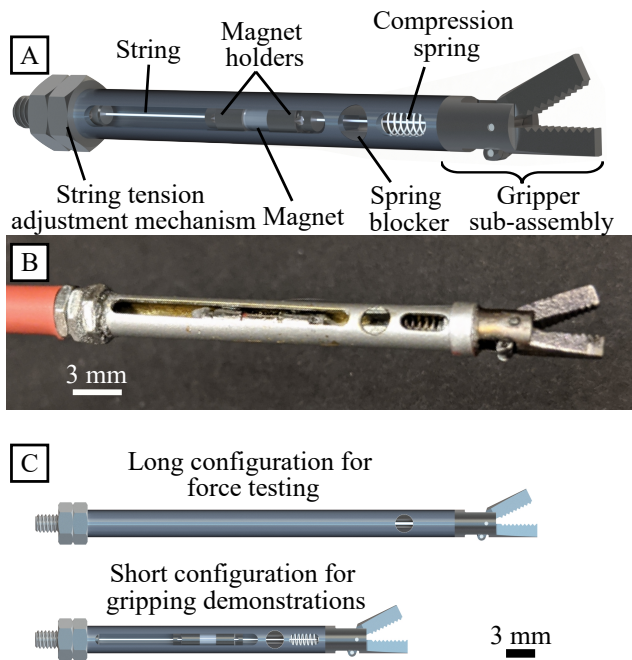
Magnetic twisted string surgical tool design concept. (A) CAD model with labeled gripper and TSA components. (B) Photograph of the final gripper design. (C) CAD illustrations of long and short configurations of the surgical tool.
